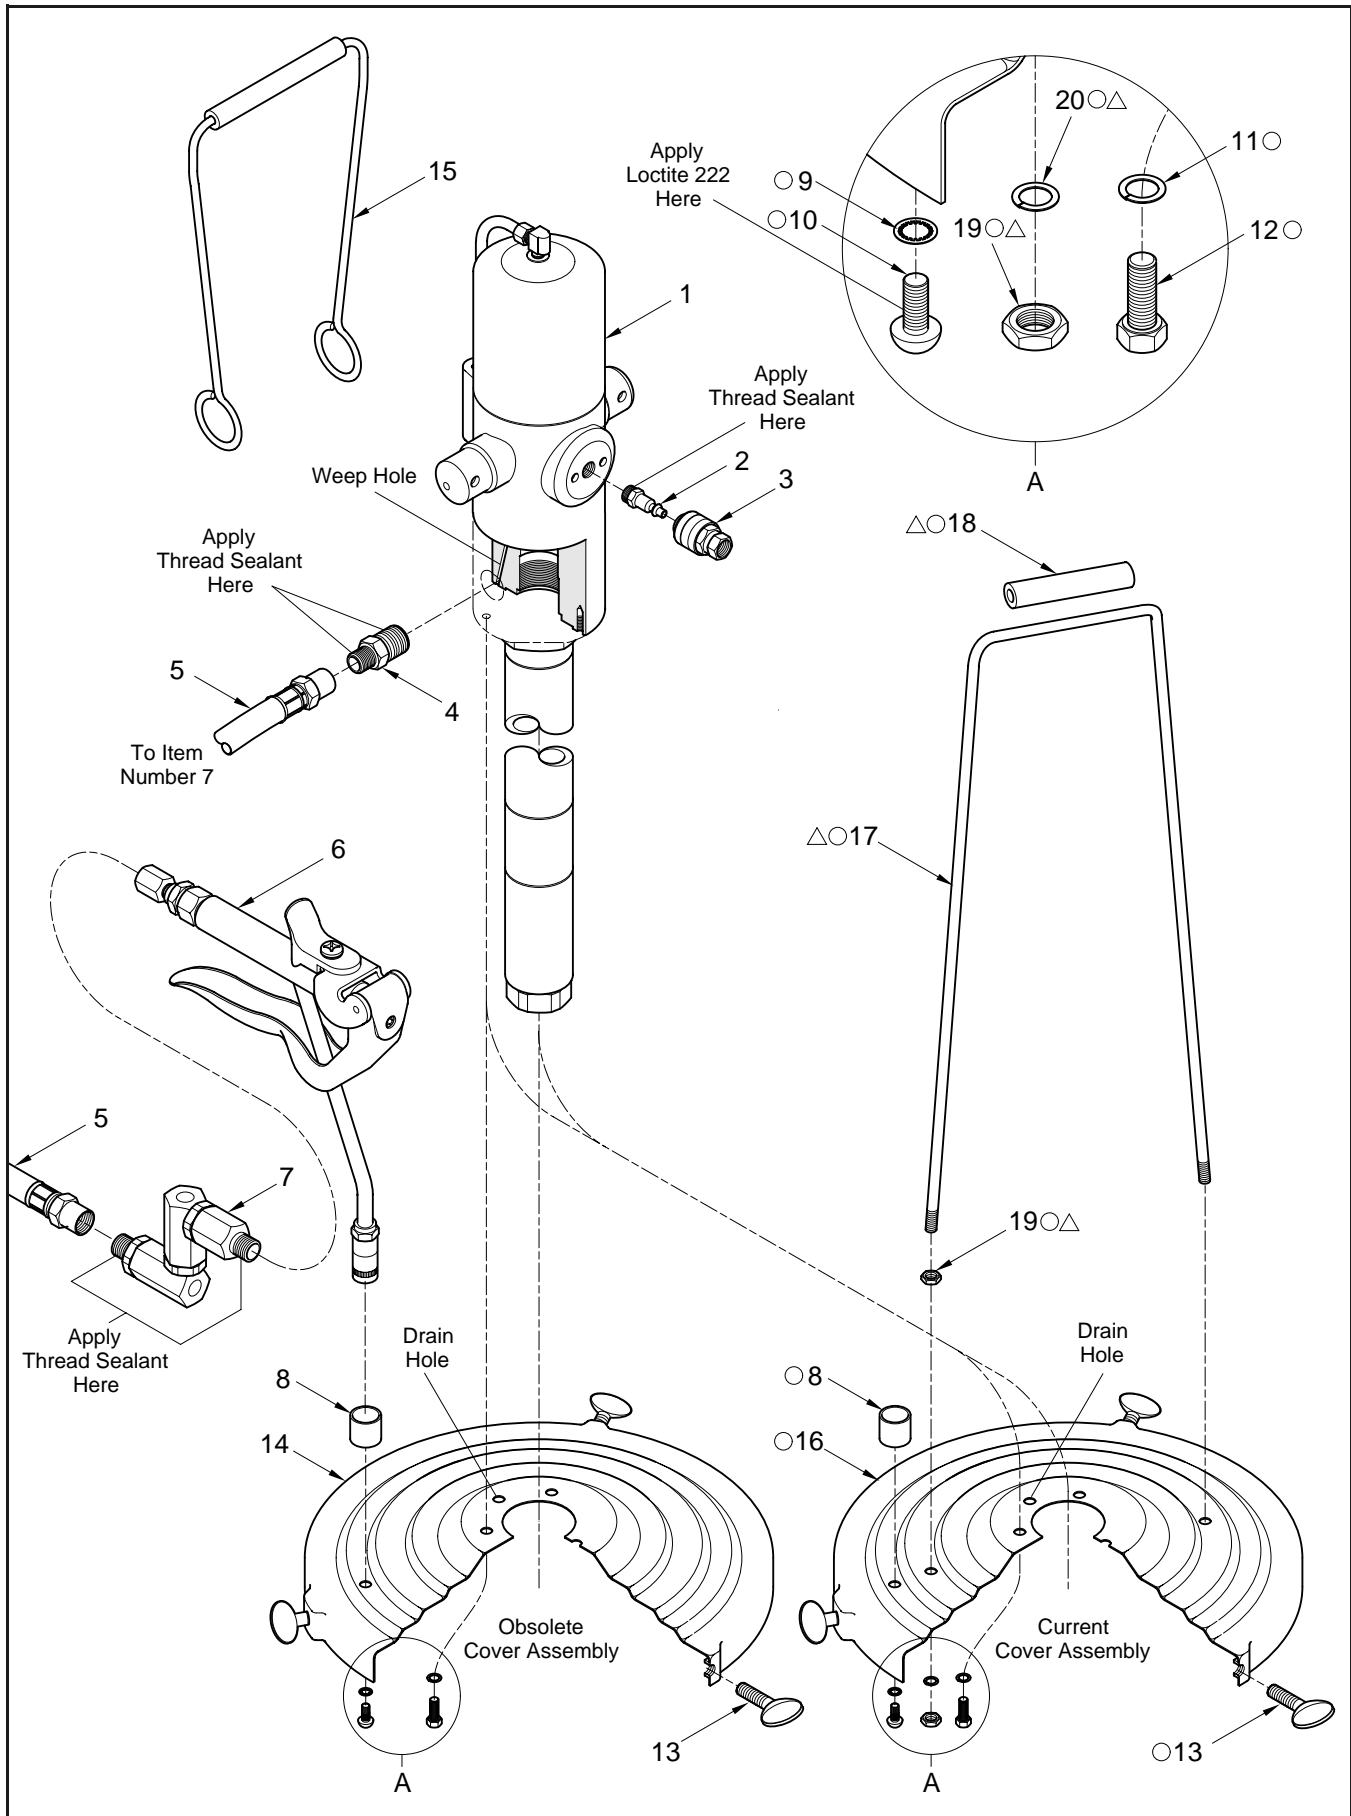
A Medium-Pressure Lubricant Pump Models 8553, 8553-1, and 8553-2 - Exploded View
